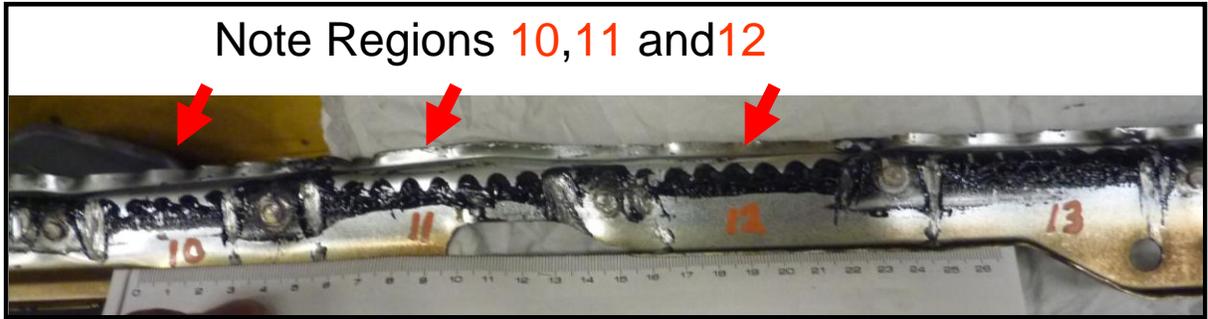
Disassembled weld-bond joint from sheet-steel vehicle body showing unintended wavy adhesive pattern in regions 10, 11 and 2, with spot weld nuggets separating regions.
